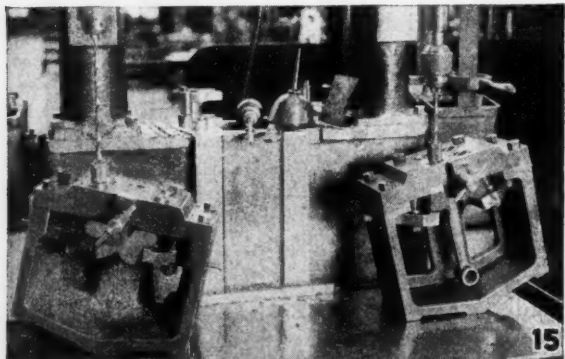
Drilling bolt holes in rod and cap. Fig. 16—drilling link rod pin holes in master rod. Fig. 17—The bearing hole is bored and grooved in this operation.
